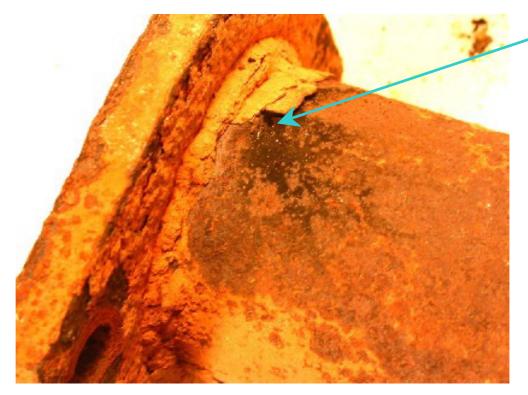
External view of single exhaust flange showing carbon deposits and hole (arrow). Note extensive corrosion.
